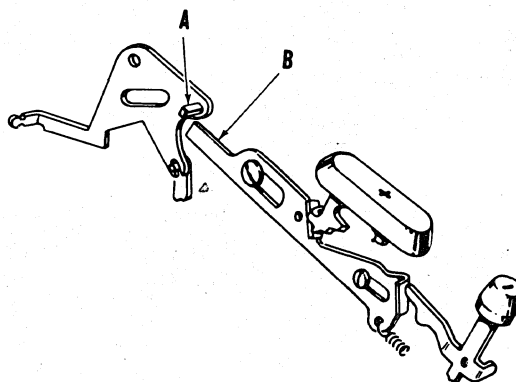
View of Interlock for Motor Bar and Subtract Key.
